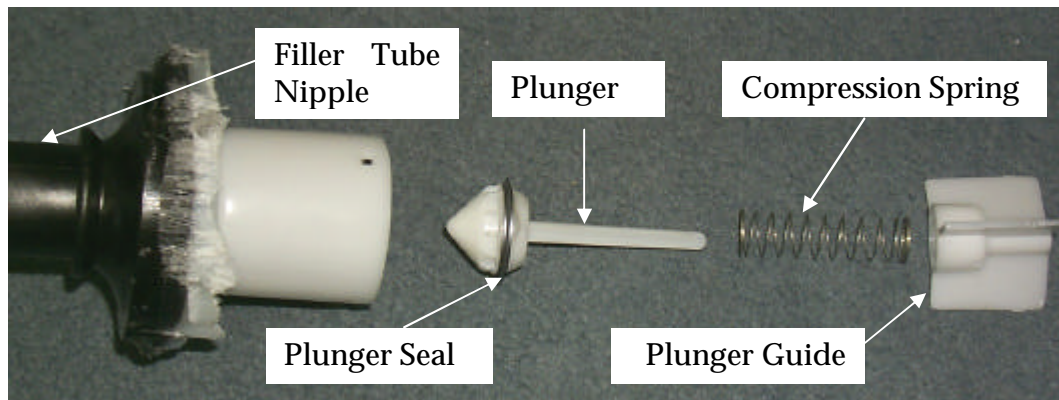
Chrysler Cirrus filler tube valve - disassembled.
